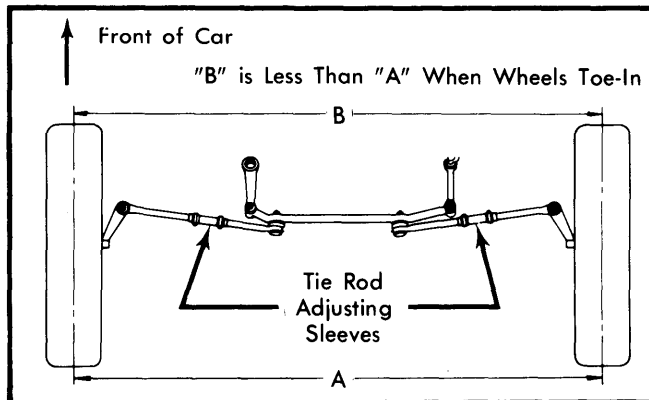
Adjusting Tie Rod Sleeves (Top View)
